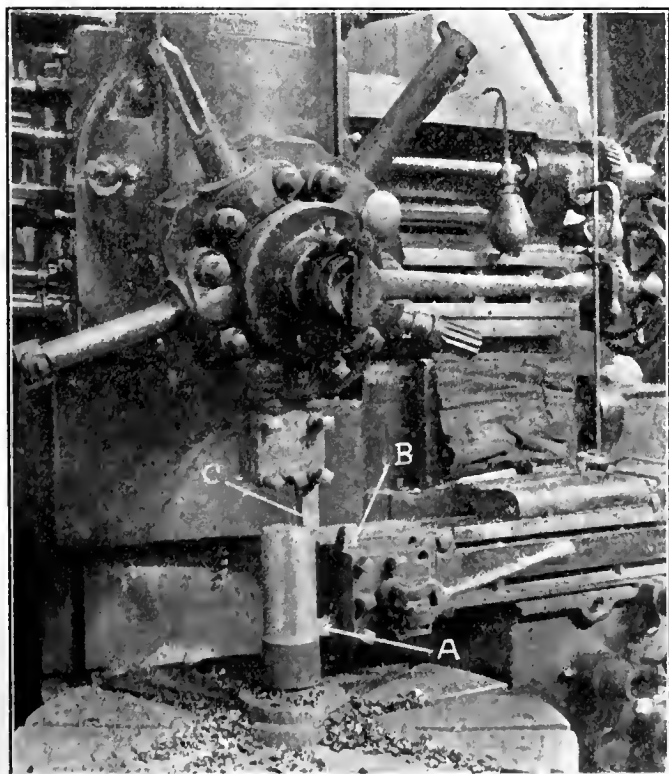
ROUGH TURNING SHELL FORGING ON "BULLARD" VERTICAL TURRET LATHE.
